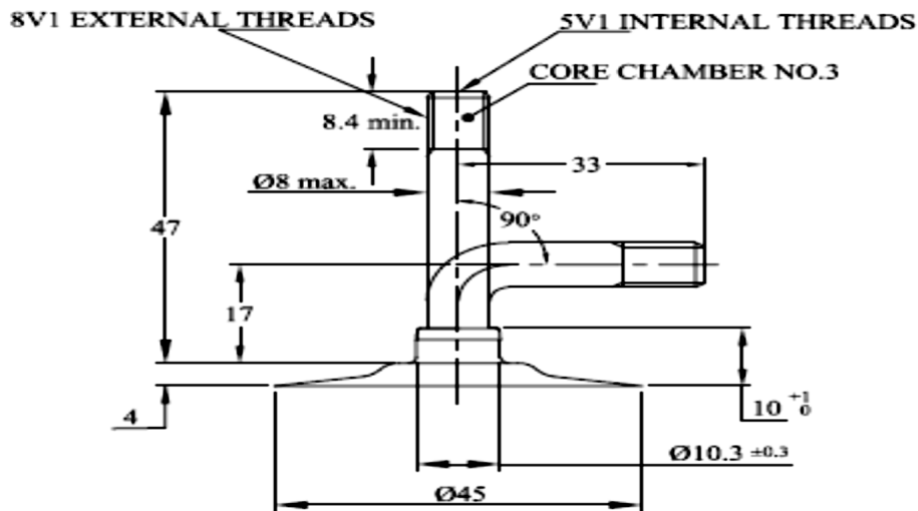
TUBELESS CLAMP-IN PASSENGER CAR VALVES
